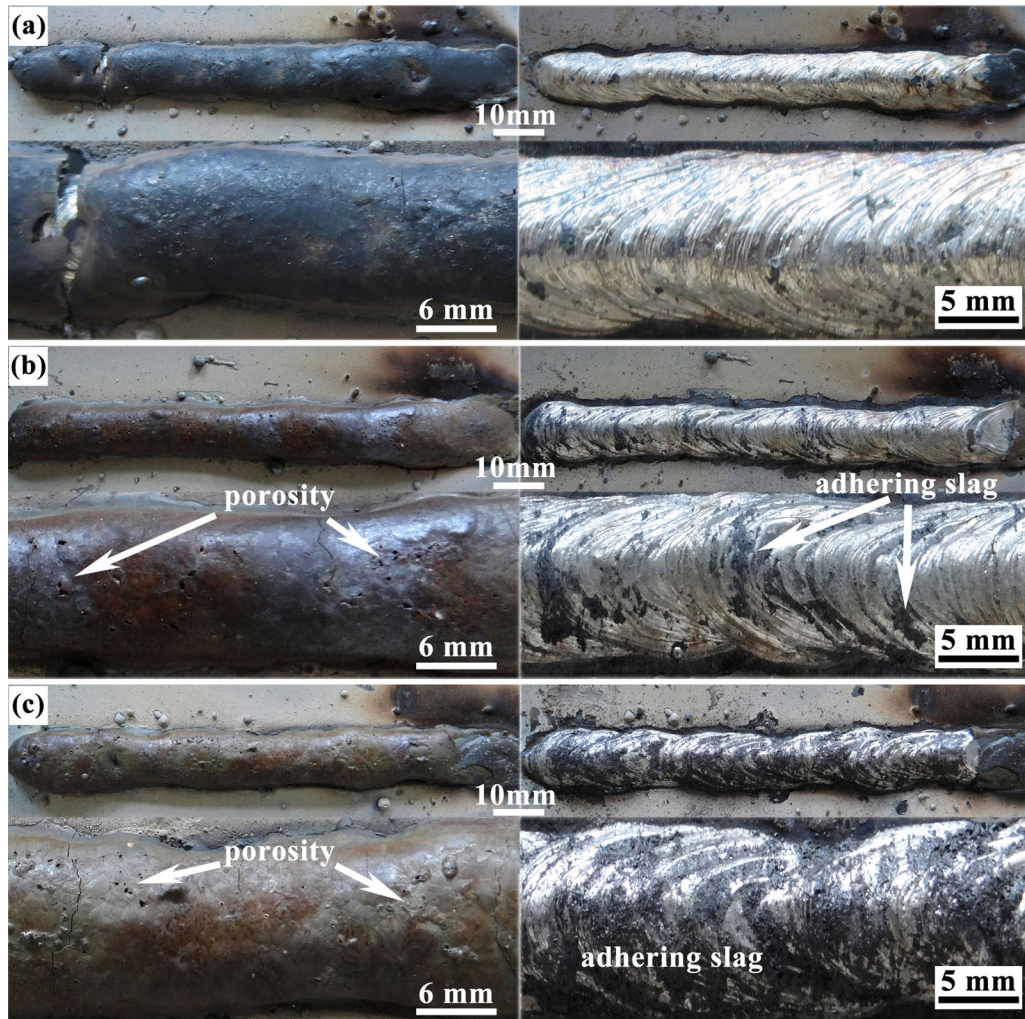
Weld images of the ENiCrFe-7-covered electrodes with A-group flux coatings. (a) A1, (b) A2, and (c) A3. The left: the welds covered by slugs; the right: the welds after removal of the slugs.
